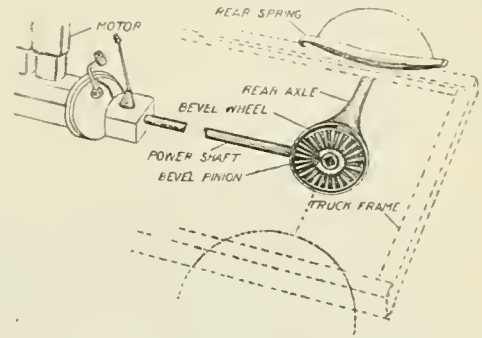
Bevel drive. The bevel-pinion on the end of the shaft meshes with a large bevel-wheel in the rear
